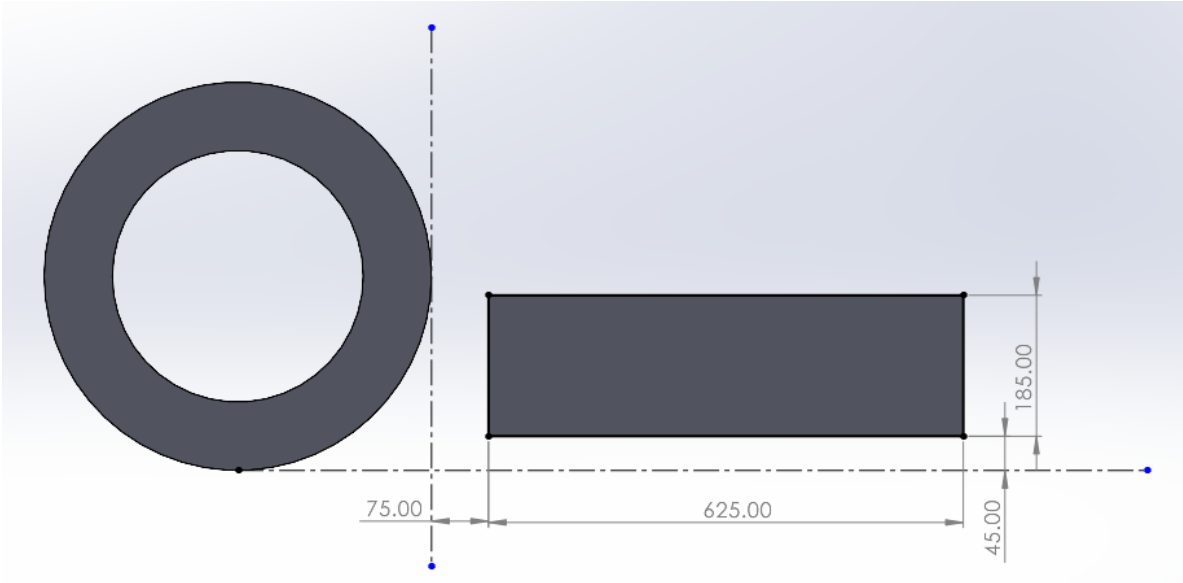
Restrictions in dimensions of the front wing assembly (side view)
